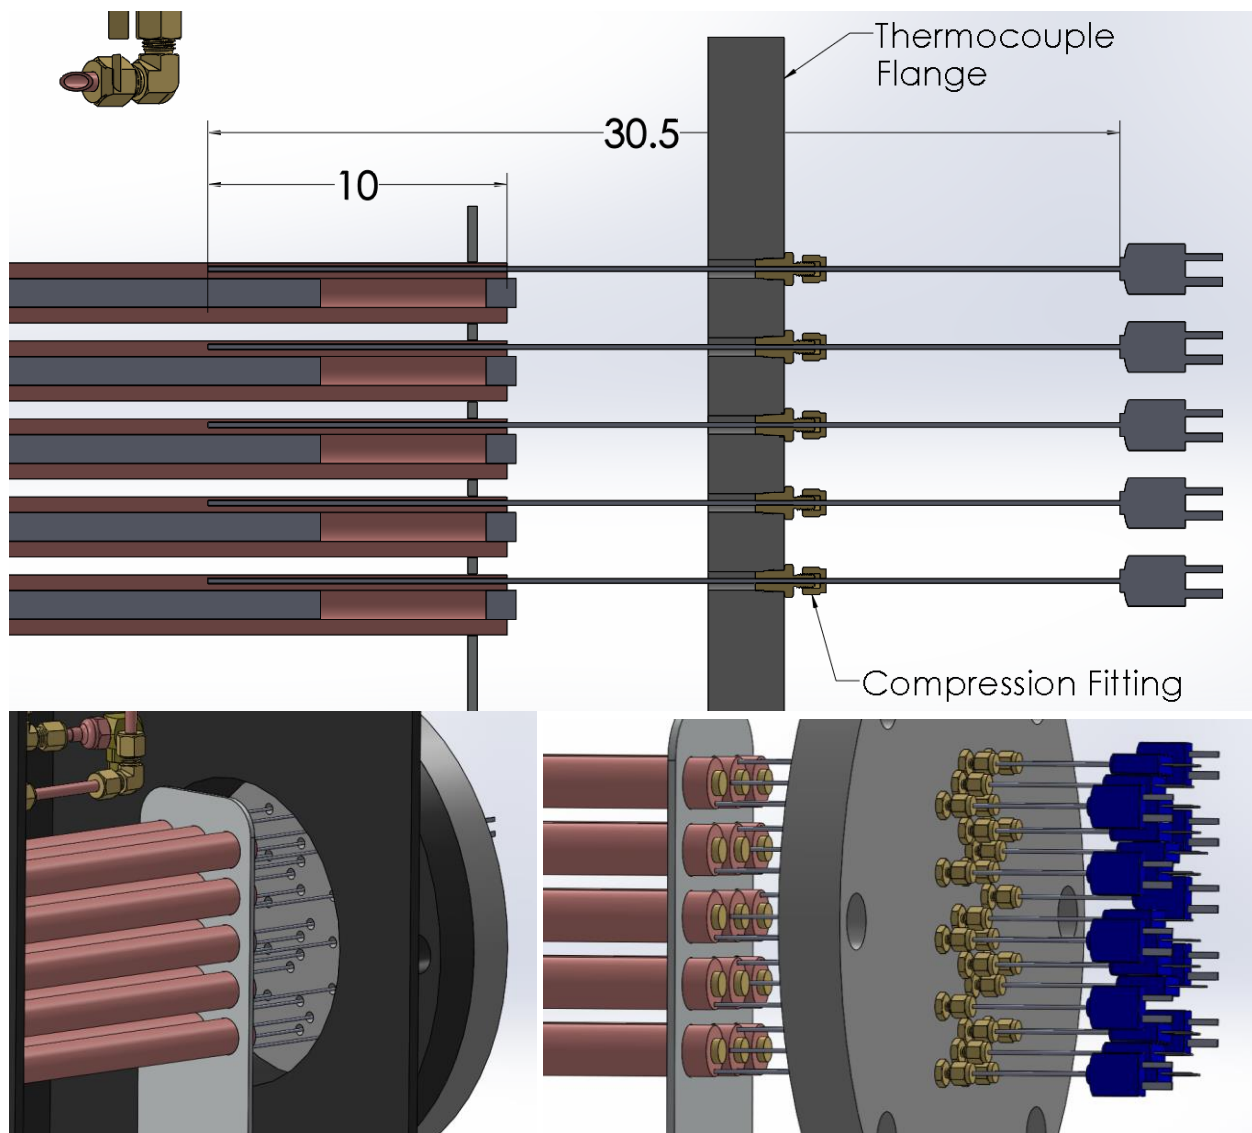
Cutaway view of the thermocouple probes as installed (top), and the inside (bottom left) and outside (bottom right) of the thermocouple flange
